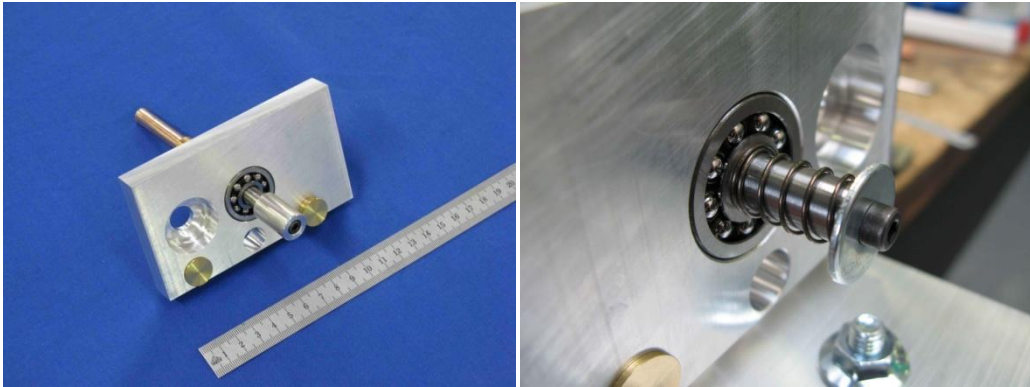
Alignment support with spherical bearings and (left) and the spring-loaded tension tool (right).
